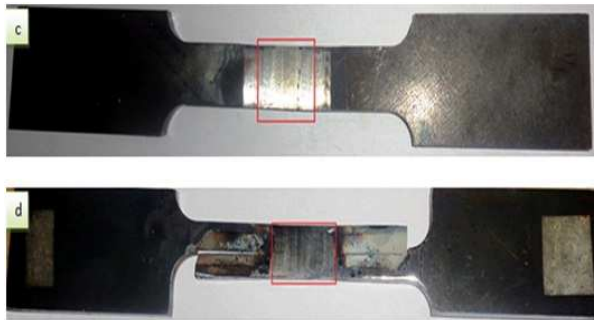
Actual specimen cut through laser beam as per ASTM E8 standards
